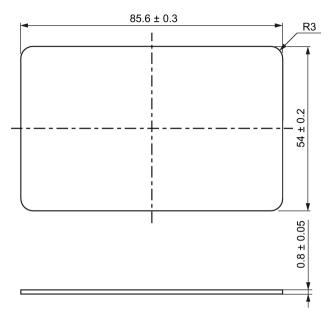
Dimensional drawing MDS D400 (dimensions in mm)
